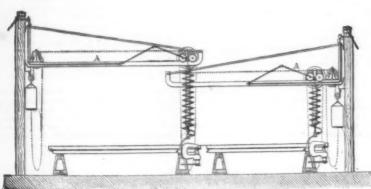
ARRANGEMENT FOR RIVETING SHIPS' FRAMES.
